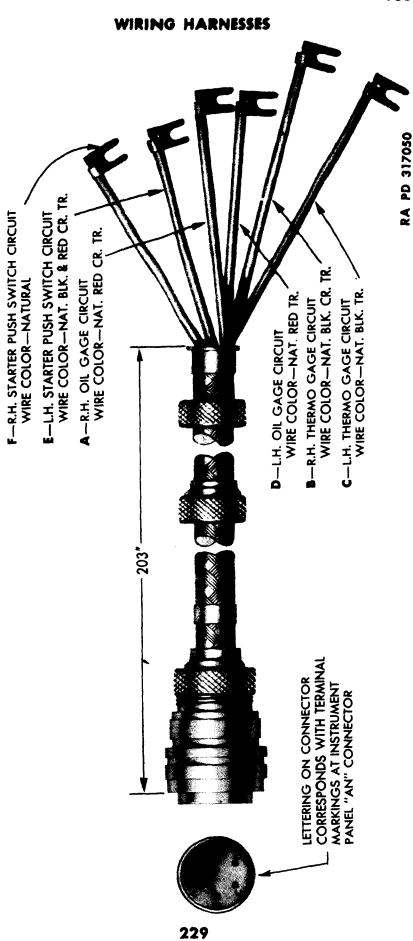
Instrument Panel to Engine Terminal Box Wiring Harness
